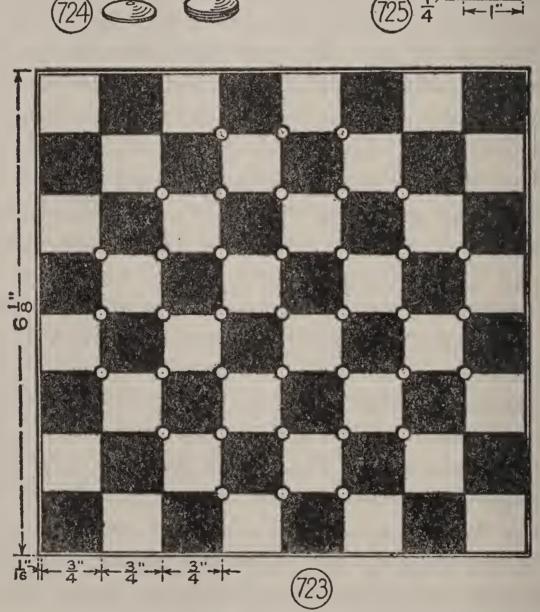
Diagram for Checker-Solitaire Board. Fig. 724.—Button-Mold Checker Men. Fig. 725.—Dowel-Stick Solitaire Pegs.
